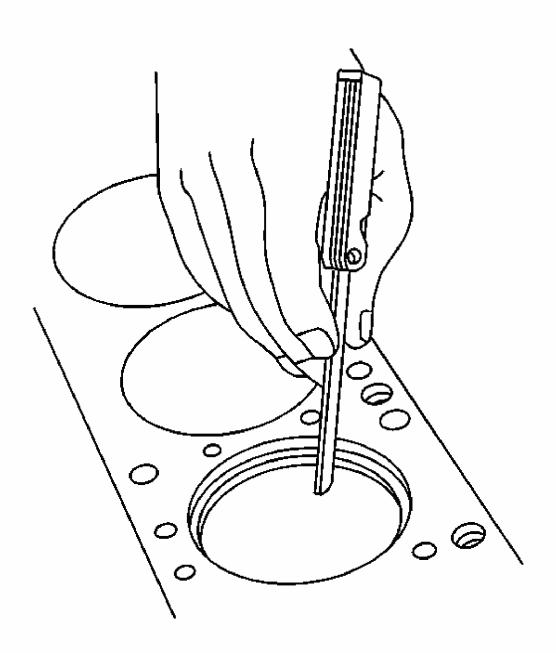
Measuring Piston Ring End Gap Courtesy of GENERAL MOTORS CORP.
